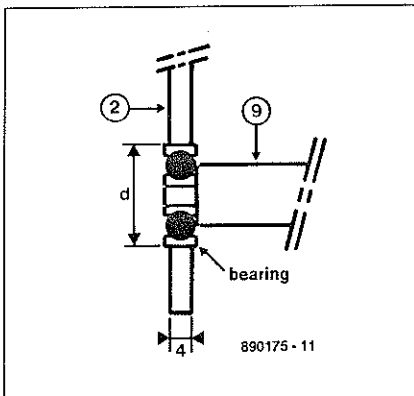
A ball-bearing may be used where the plate is secured to the side plate.
